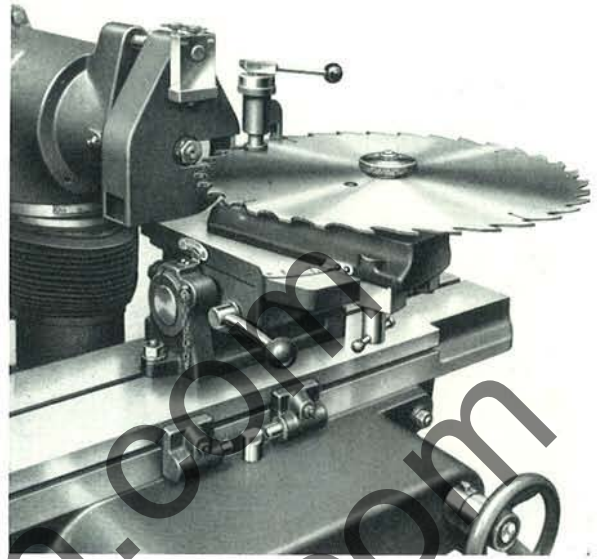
Tungsten carbide tipped saws between 8" and 18" diameter can be reground on this attachment. Square or bevel topping, also facing operations, are performed separately. The saw is positioned on self-centering bushes and the tooth to be ground located by a disappearing plunger pin. A diamond impregnated wheel is used for this operation.
